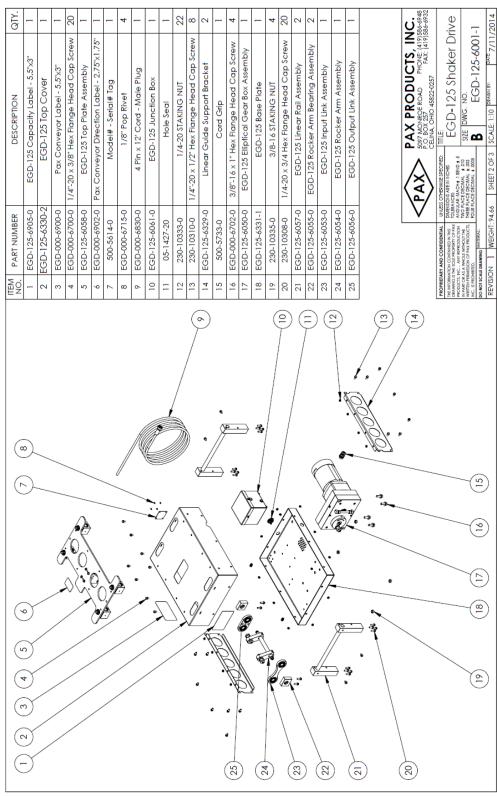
EGD-125 DRIVE UNIT ASSEMBLY
